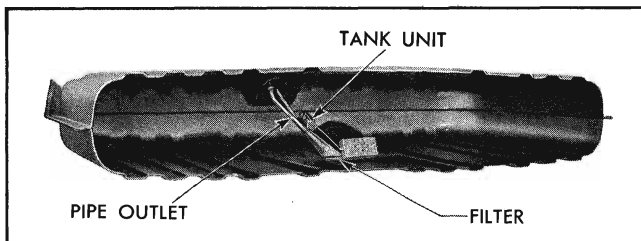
Fuel Gauge Tank Unit Installed in Tank
